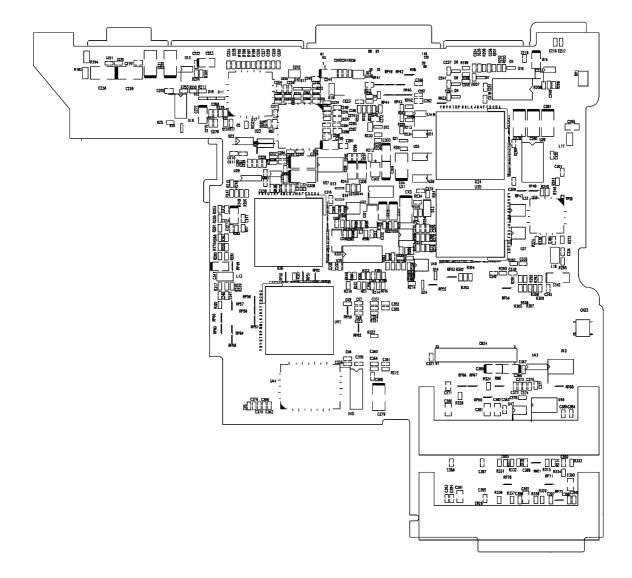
PCB No. 96183-1A Mainboard Layout (Bottom)
